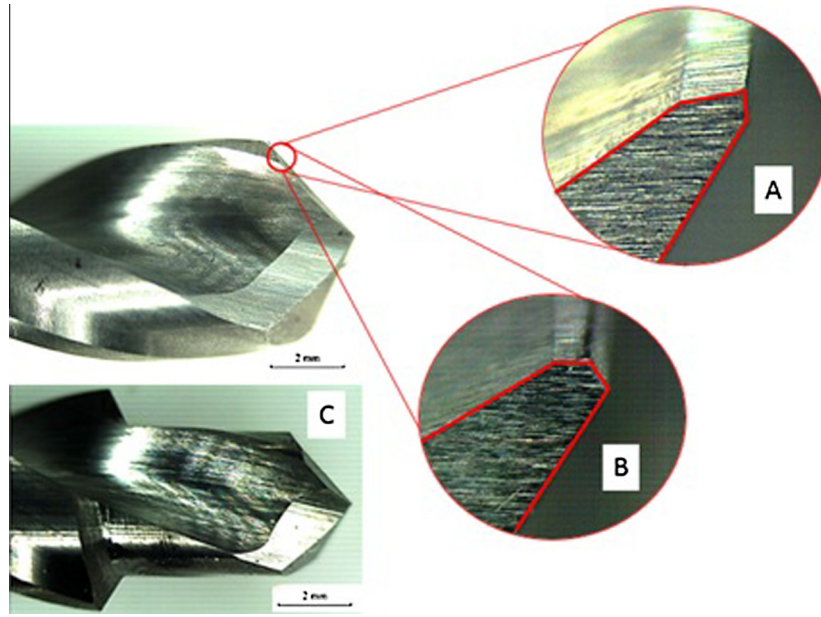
Drill bit geometries for fresh drill (A), honed edge drill (B) and step drill (C).
